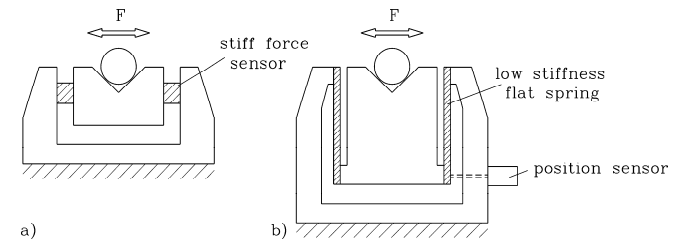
Measuring rotor imbalance a) with bearing force measurement, b) bearing position measurement
